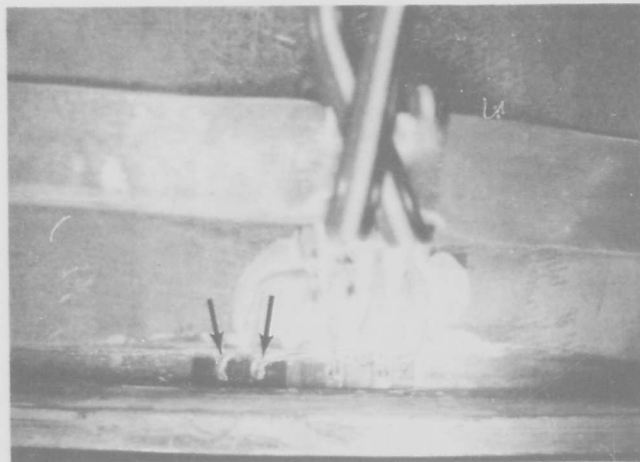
FNA-06 Fatigue Gage (Left Arrow) and Strain Gage (Right Arrow) Mounted on Chaparral Clamp Ring Groove of Motor Tube for Laboratory Test.
